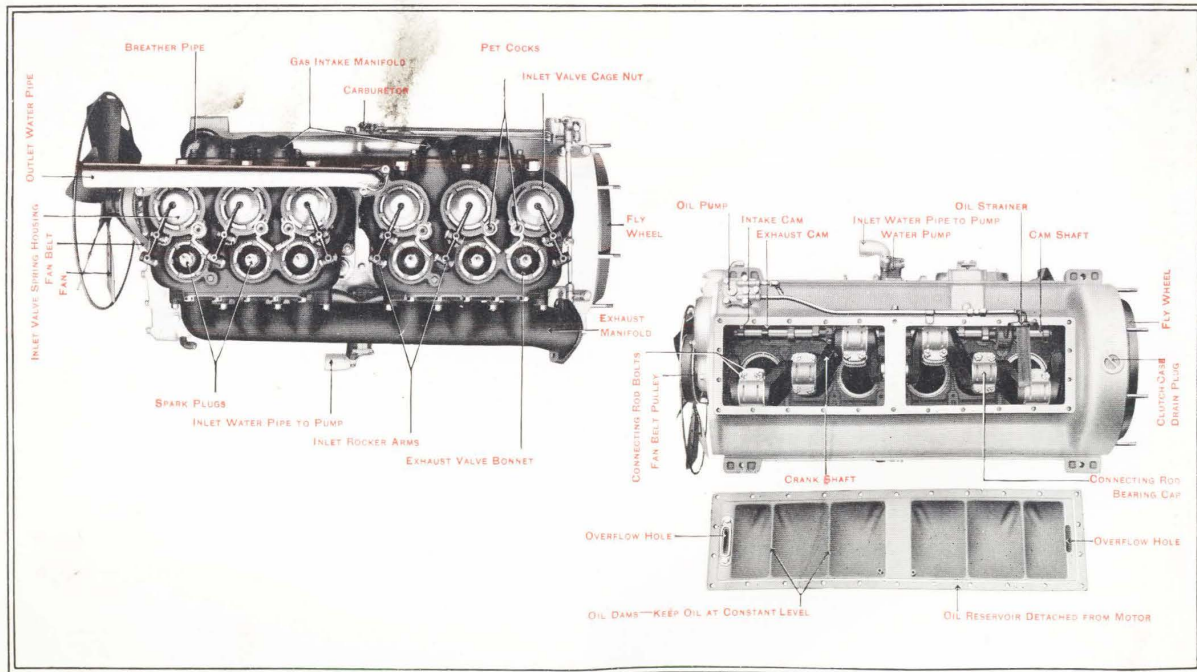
Top and Bottom Views of Chalmers "Six" Motor
